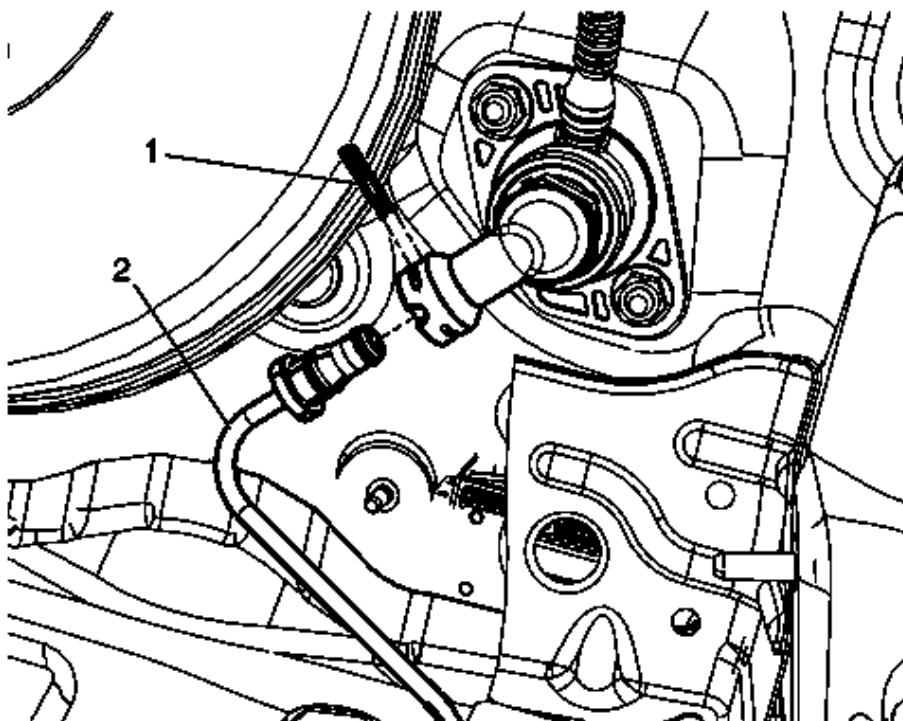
Retaining Clip And Clutch Actuator Cylinder Front Pipe
